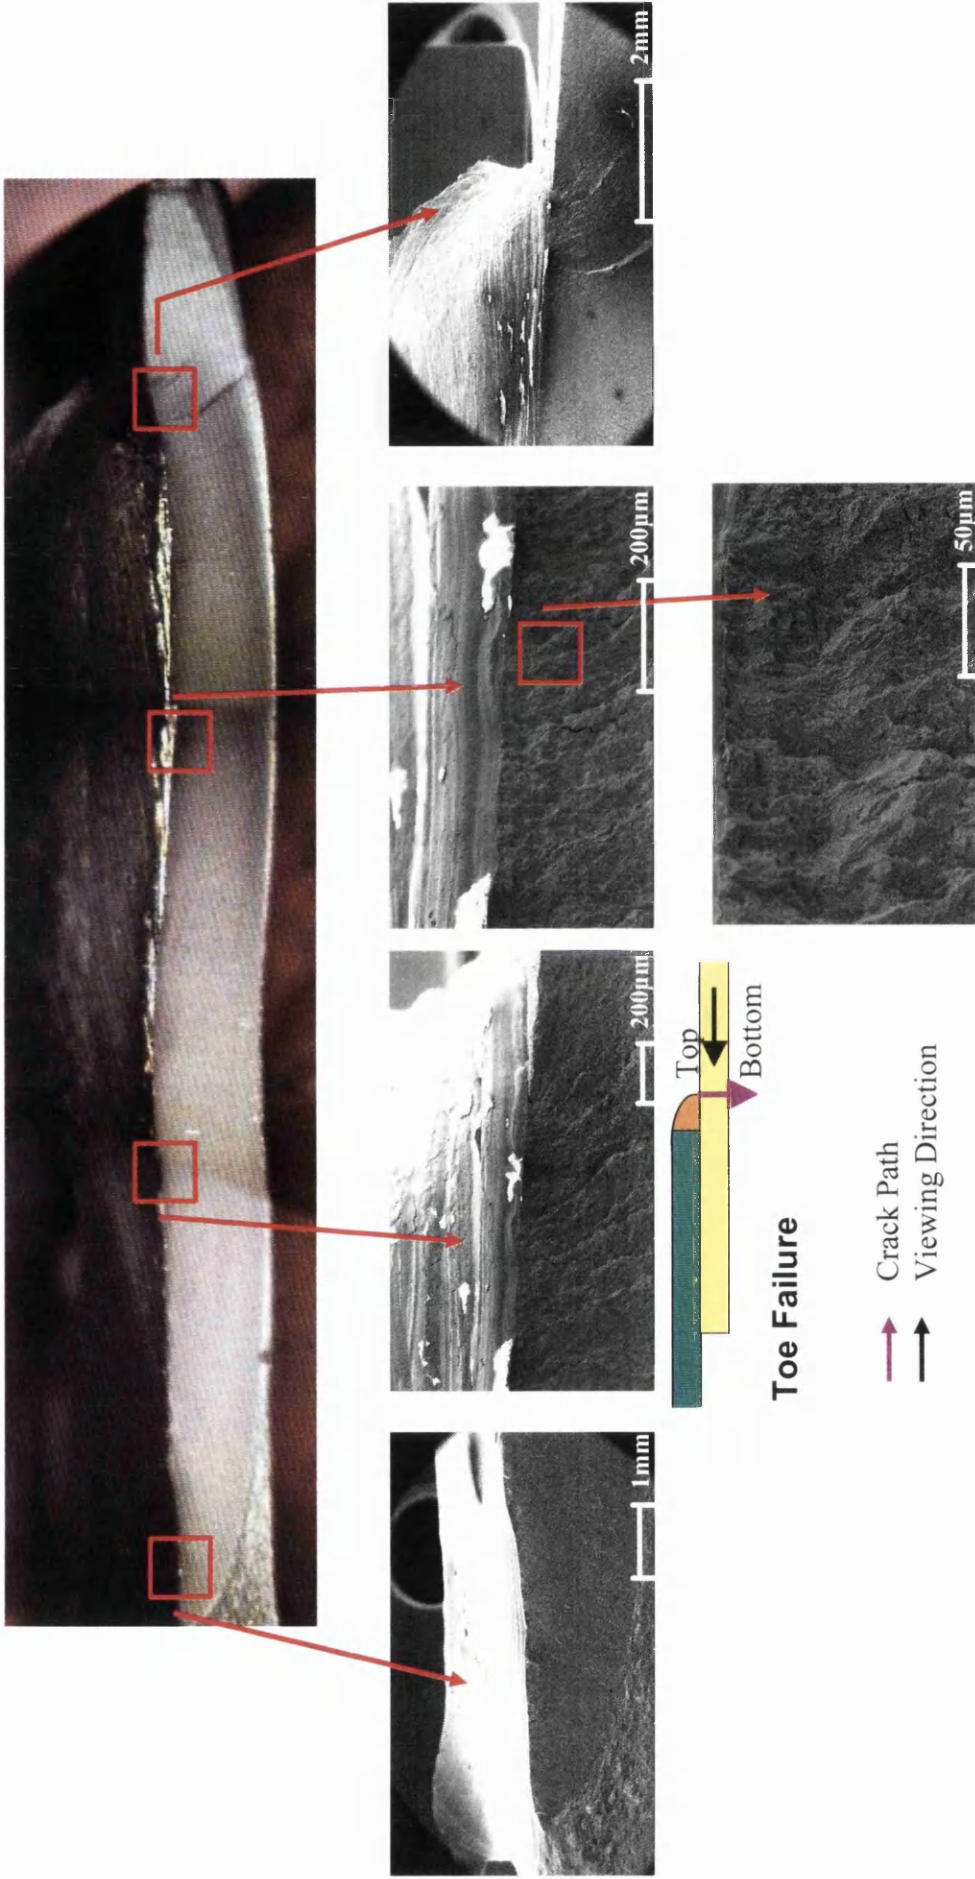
Typical Fracture Surface for TM1 Weld Toe Failure – Weld View
